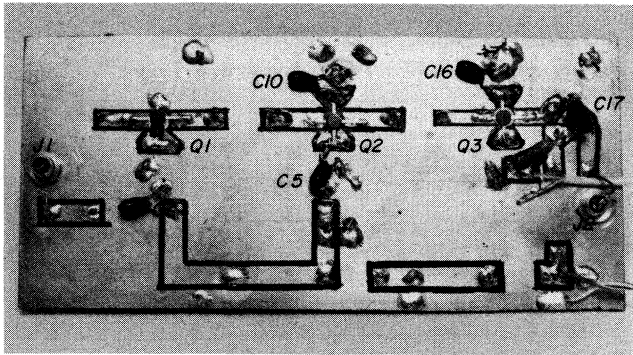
Printed-circuit layout for the 404-MHz local-oscillator chain. Component mounting and shield placement is shown in the photograph.
